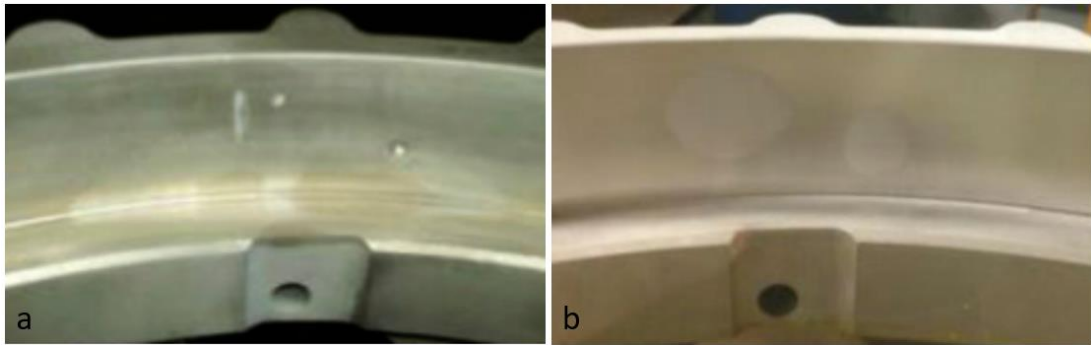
a) Magnesium Casting Defect b) Cold Sprayed Repair Casting [21].
